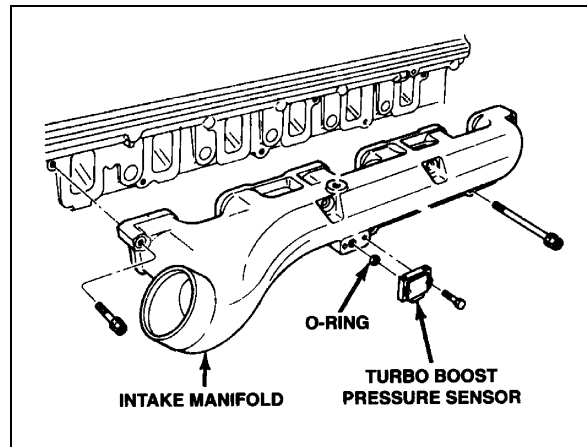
TURBO BOOST PRESSURE SENSOR 01023
